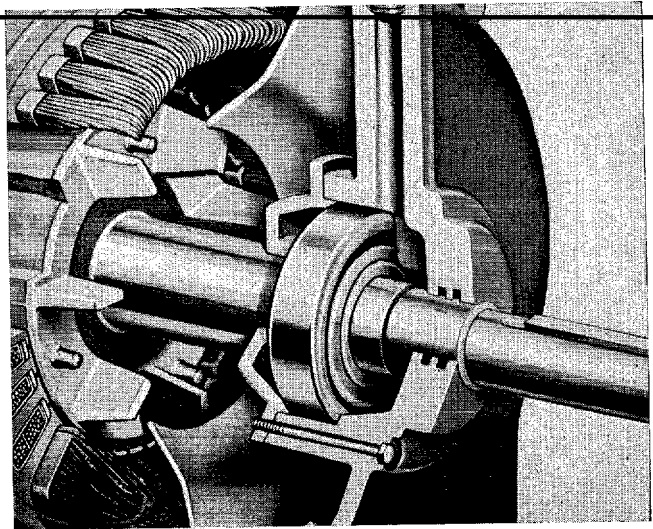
Cutaway view showing shielded ball bearing installed in a general-purpose cage motor.
